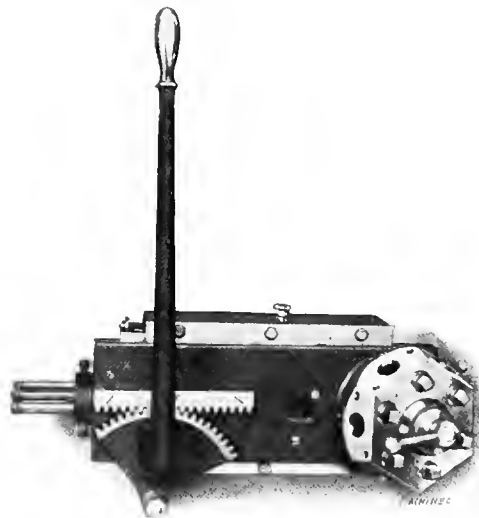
Lever Feed of No. 1 Tilted Turret Screw Machine
